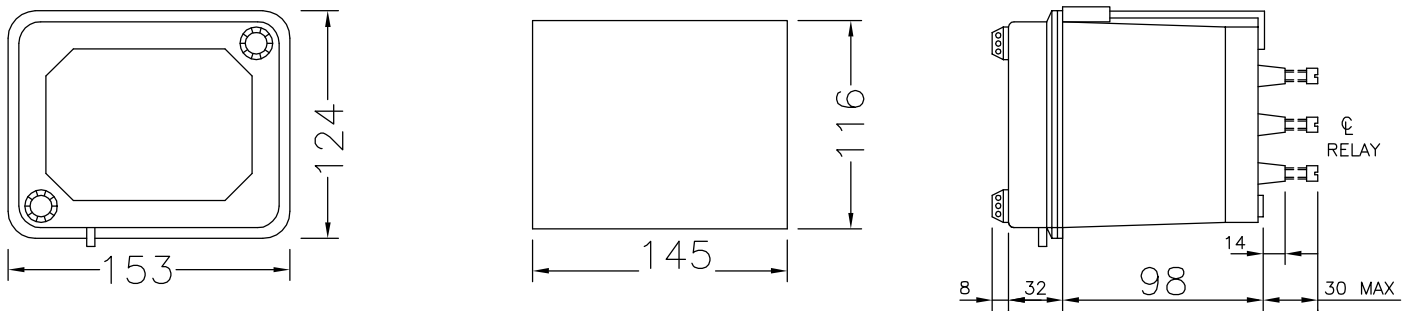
Case and panel cut-out dimensions for case 1/2N (all dimensions in mm)
